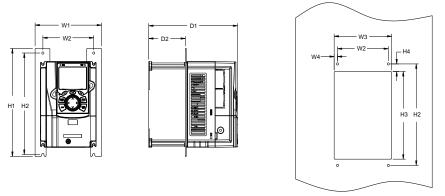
Flange installation diagram of inverters of 220V 0.75-15kW and 460V 1.5-30kW
